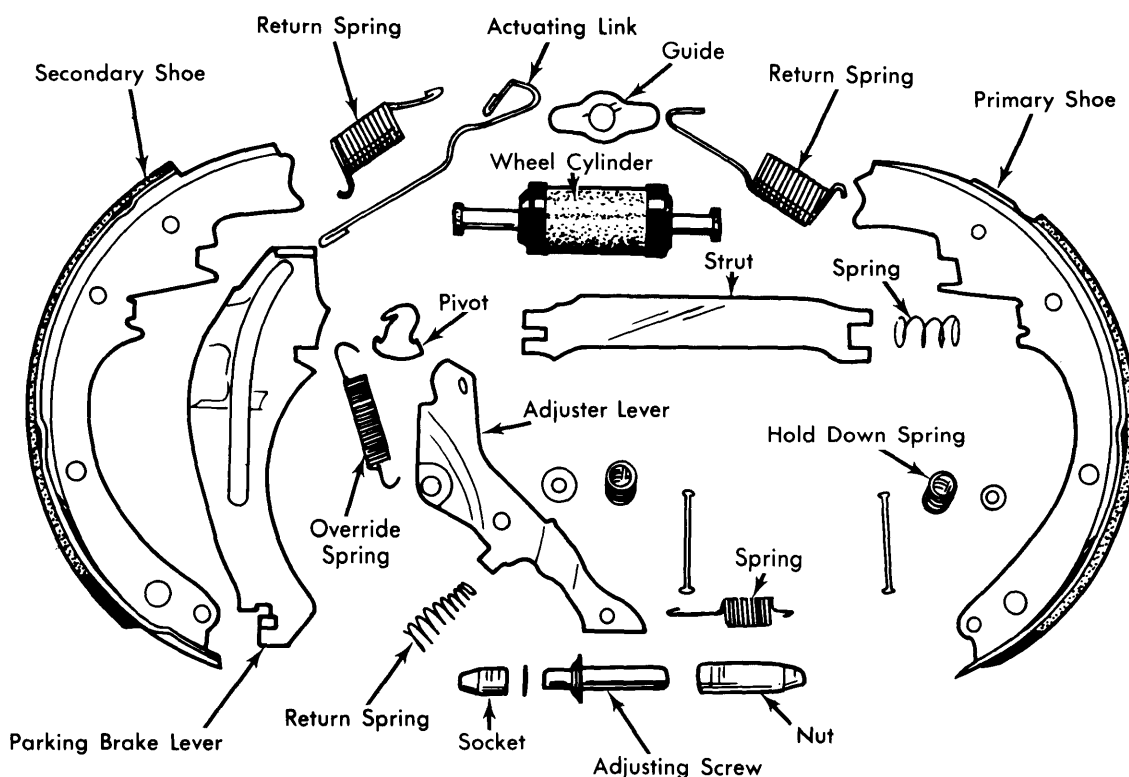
Exploded View of Automatic Adjuster Brake Assembly
